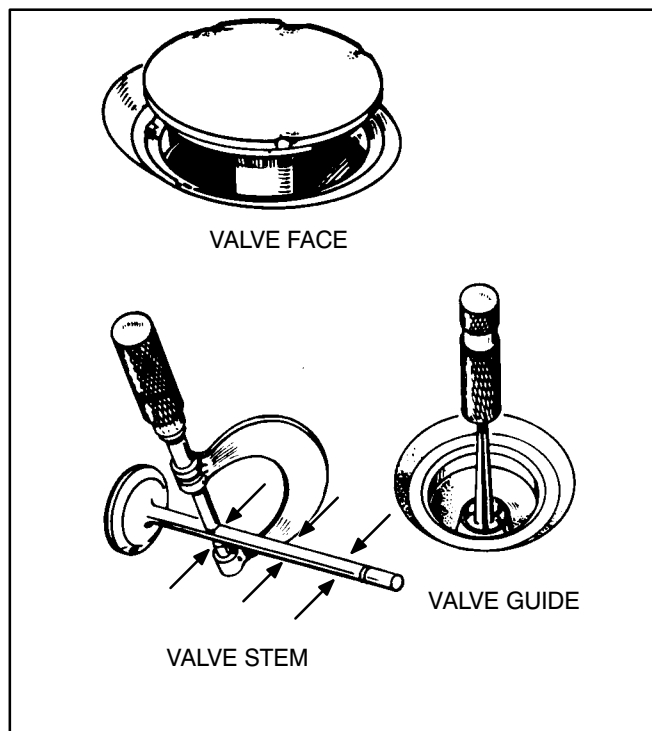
VALVE FACE, STEM, AND GUIDE
